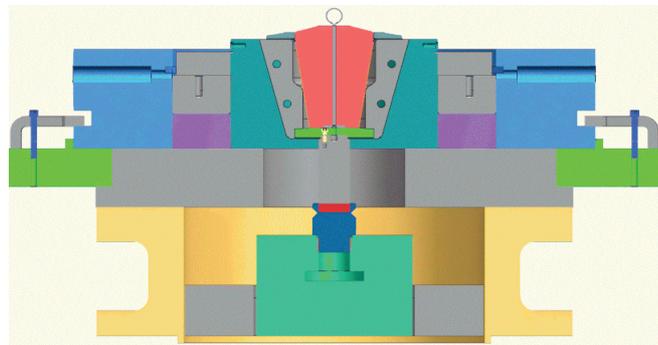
Cross-section of the device to form the bearing housing on the SAAB press
